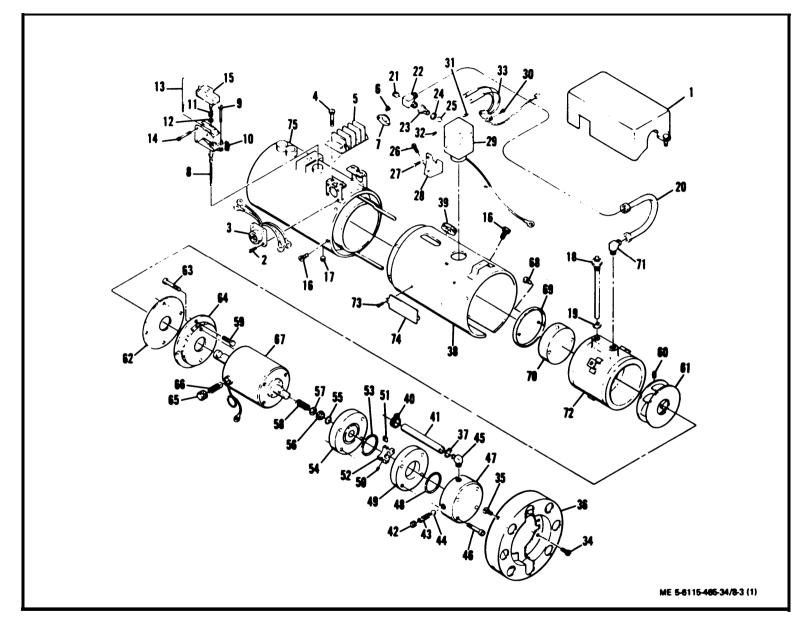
Fuel Burning Heater Assembly, Exploded View (Sheet 1 of 2)
